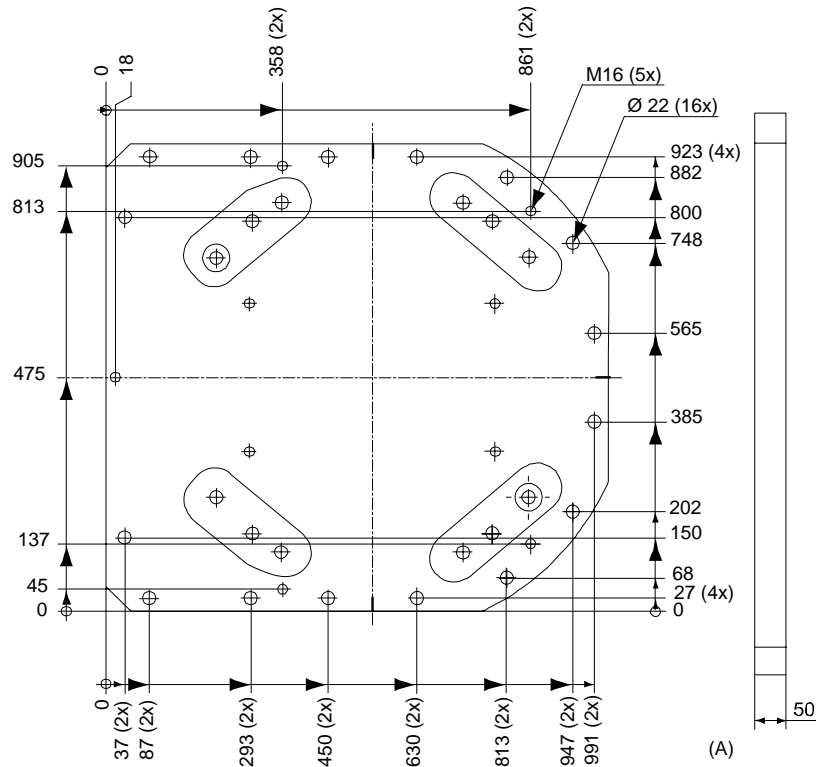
Base plate dimension print, main dimensions and holes measurements (dimensions in mm).
